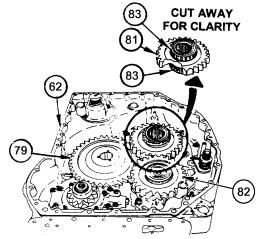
Range Output Gears, Steer Shaft Drive Gear and Replacement Bearings.
